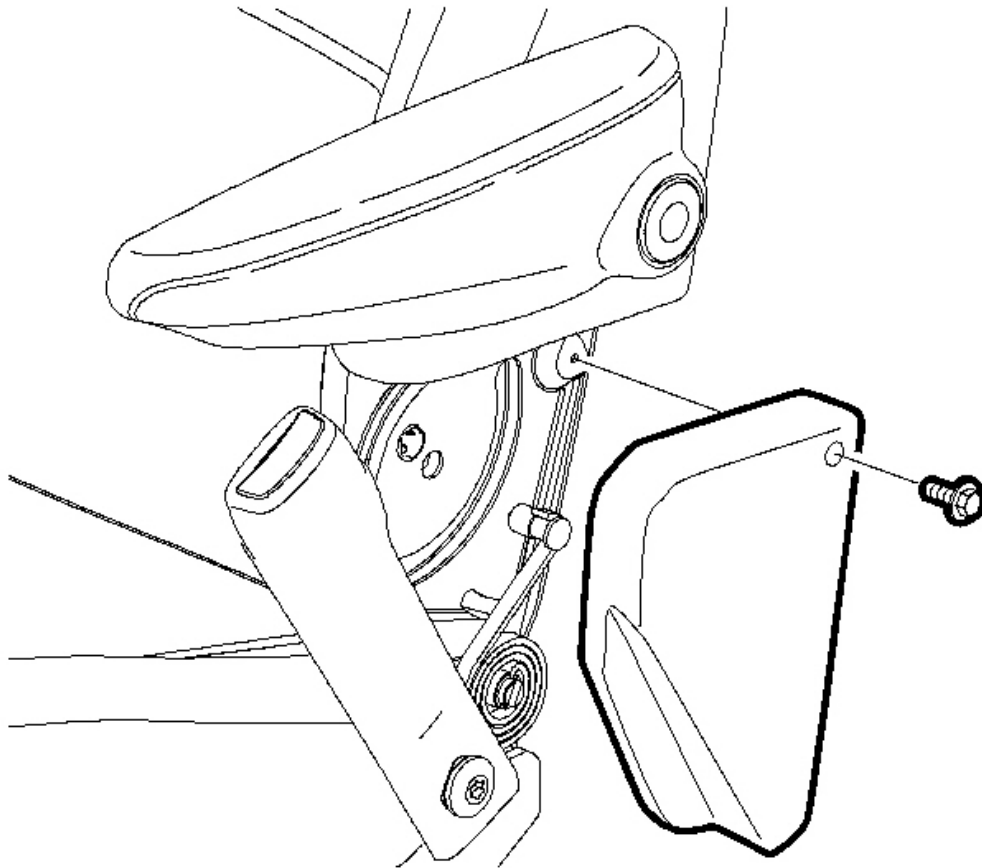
Removing/Installing Inboard Recliner Trim Panel
